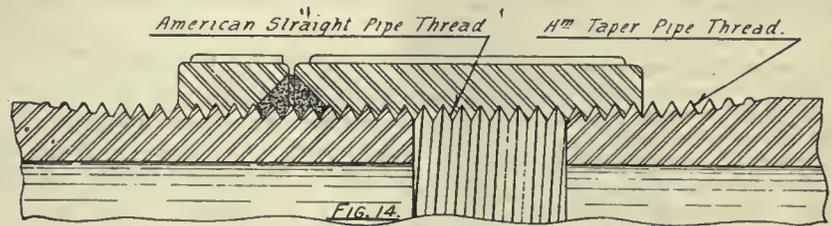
STRAIGHT AND TAPER THREAD CONNECTION
